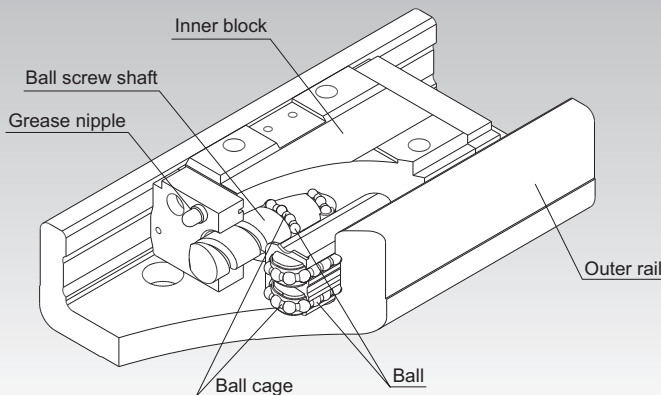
Structure of the Caged Ball LM Guide Actuator Model SKR
